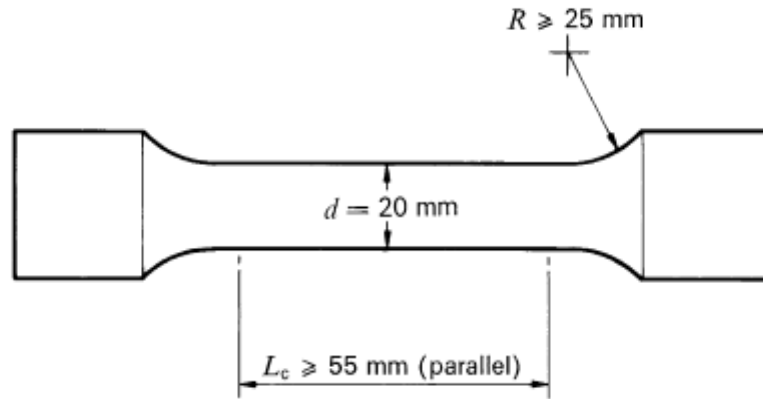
Test specimen dimensions for grey iron castings - II
